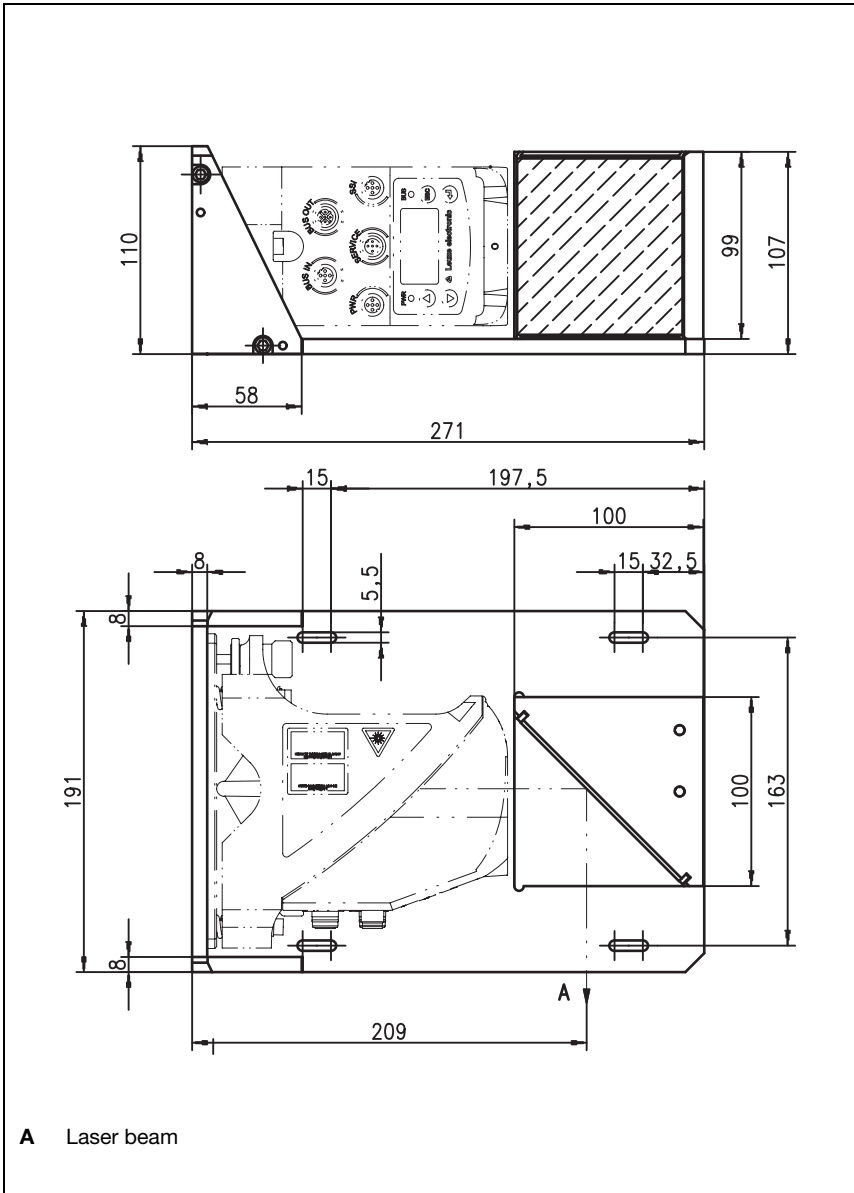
Dimensioned drawing of US AMS 01 deflector unit
